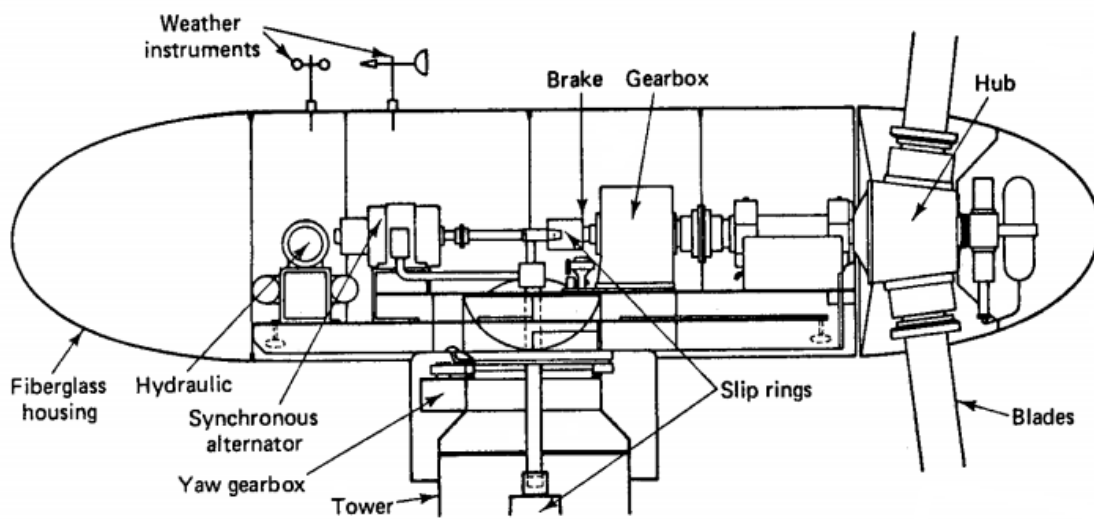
Internal equipment in a horizontal axis wind turbine.(Johnson, 2006)
